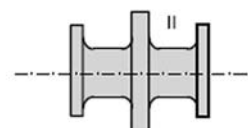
Zones for magnetic particle / liquid penetrant testing on crankshafts
